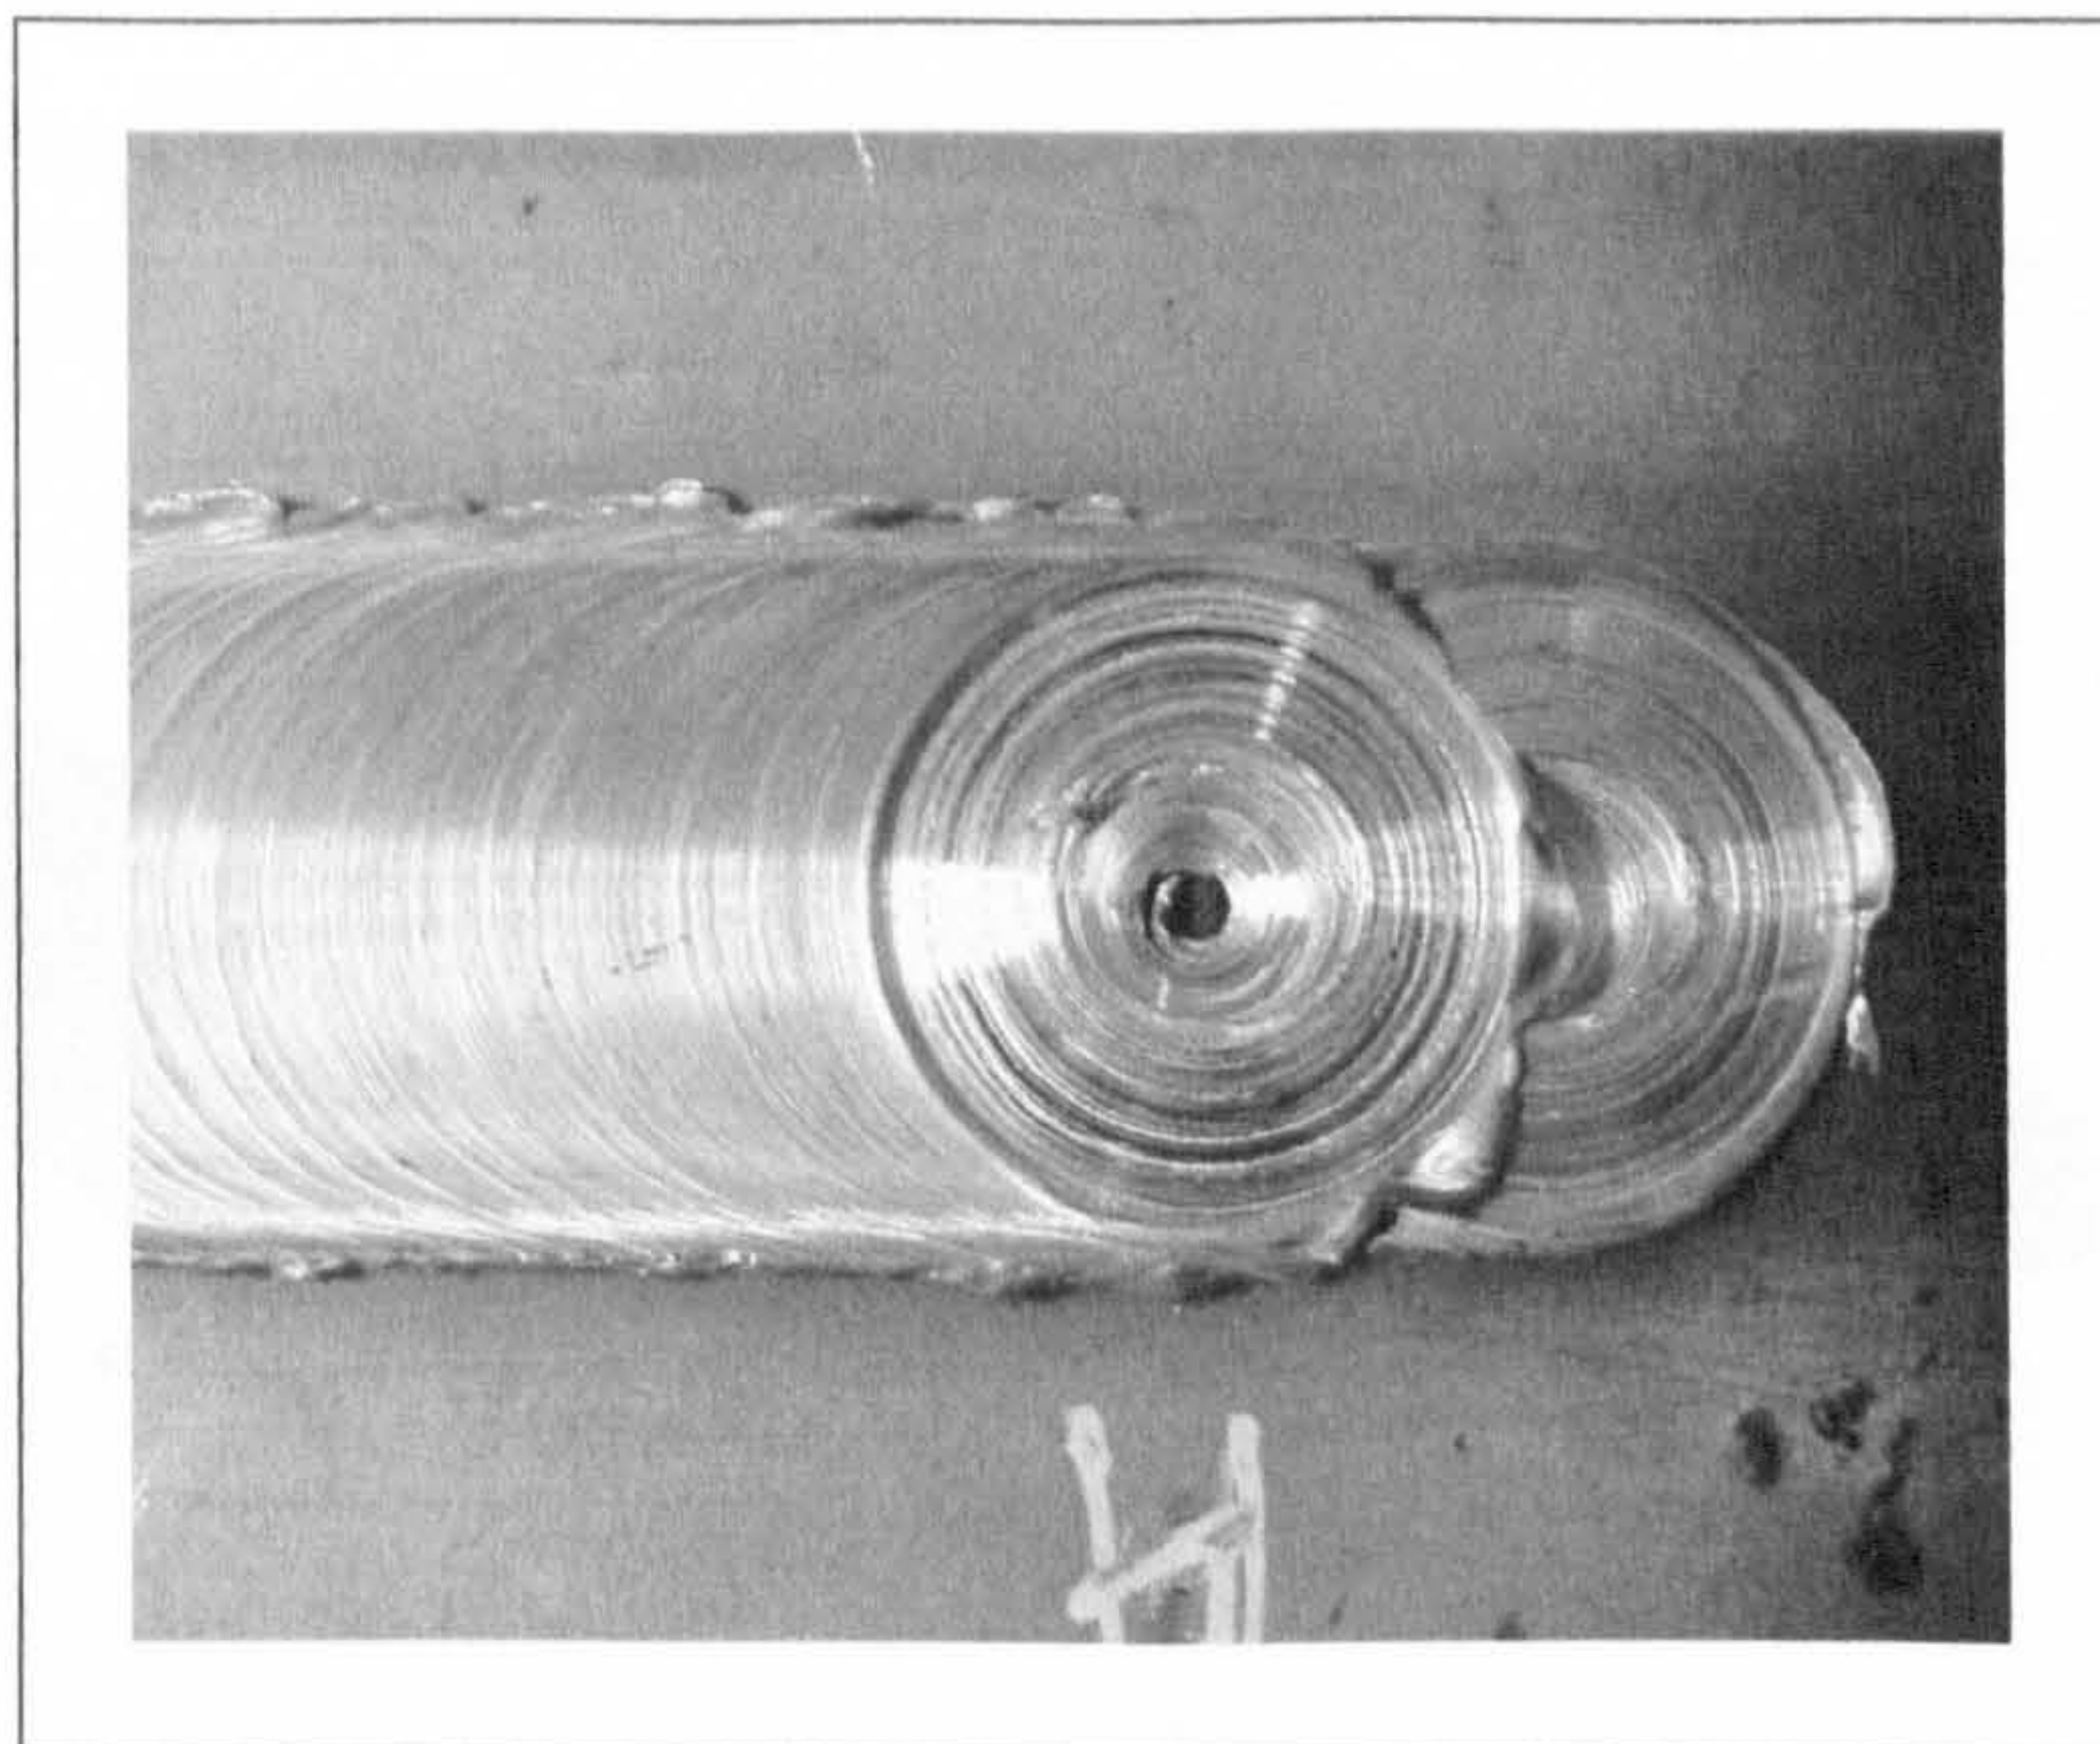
Friction stir weld lip and pin exit hole.
